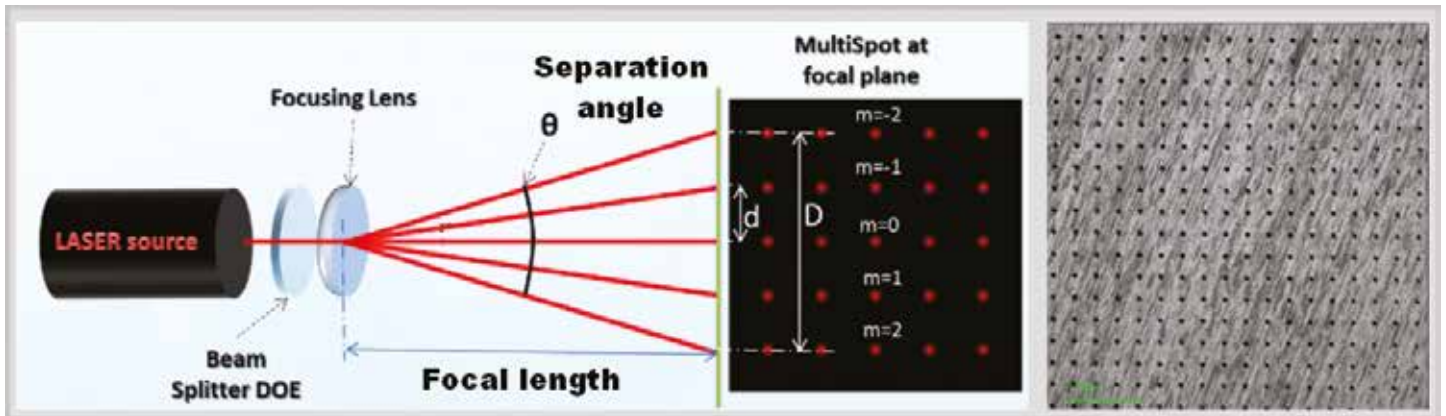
Basic principle of multi-beam processing (left) [5] and sample with multiple drilled holes (right).
